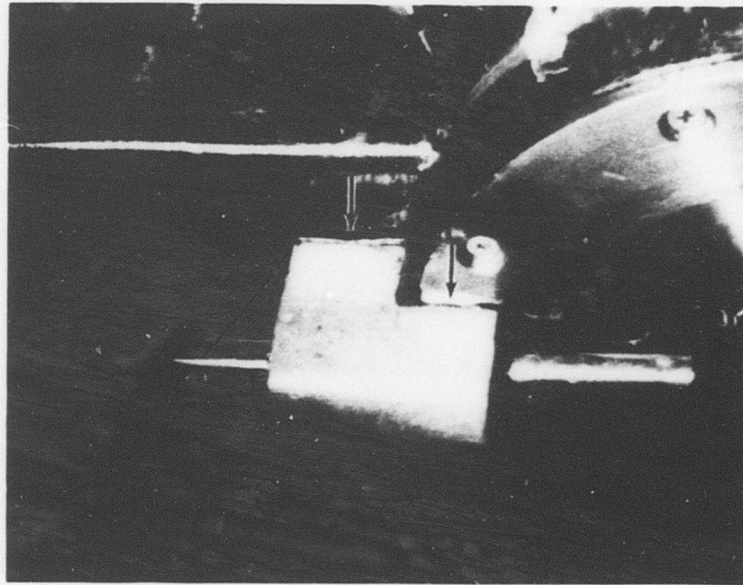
Interior Boss That Houses Oil Jet for Input Pinion Roller Bearing After Failure.
